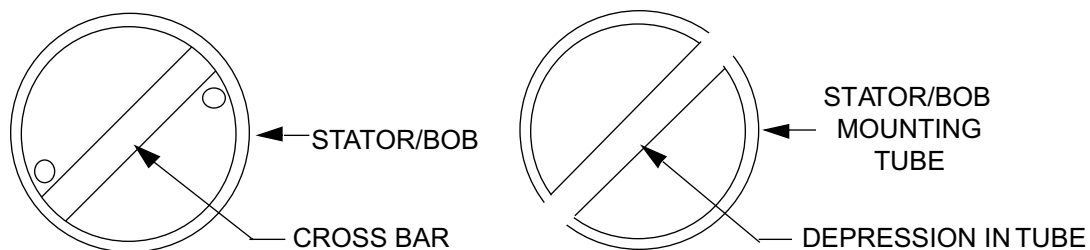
Stator/Bob Mounting Tube Alignment (End View)
